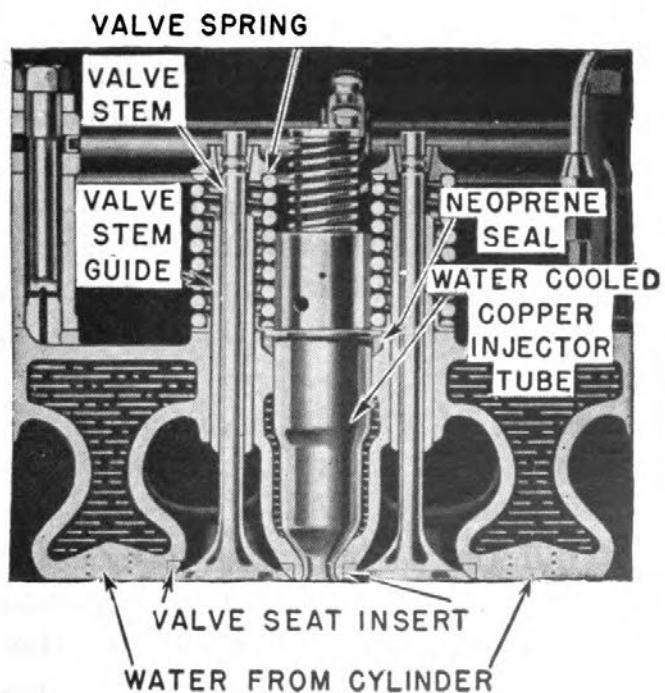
Water passages in cylinder head of a Gray Marine engine.
